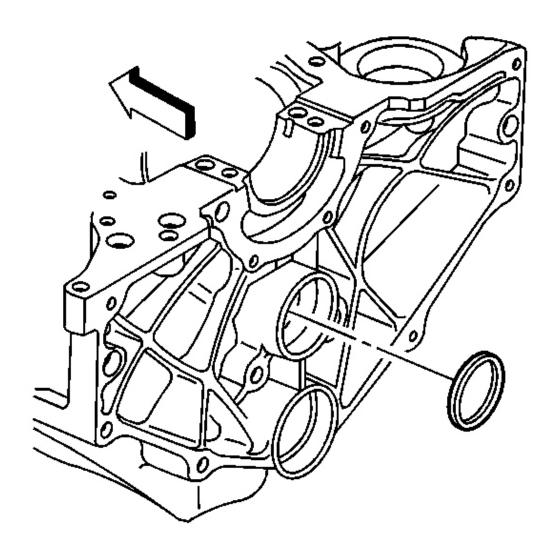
Identifying Camshaft Rear Bearing Hole Expansion Cup Plug Courtesy of GENERAL MOTORS CORP.
